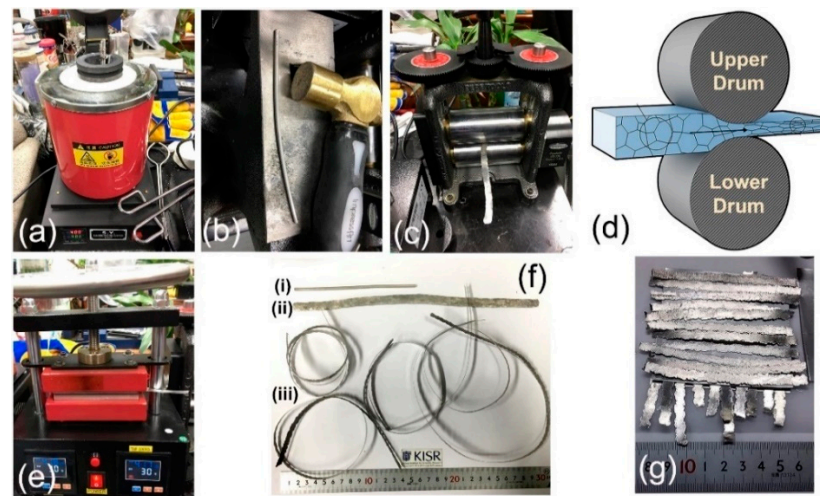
(a) Induction melting furnace hosted the Mg-rods, (b) forging process, (c) cold rolling process, (d) schematic illustration of drawing a Mg bar, using two-drum cold roller machine, (e) warm pressing, (f) original Mg-rod (i), Mg-strip obtained after forging at 400 °C for 200 times (ii), (iii) final product after re-cold rolling for 10 passes. Final product of Mg ribbons obtained after 300 passes of cold rolling, and (g) array of snapped Mg-strips ready for coating with Ni powders, using cold spray technique.
